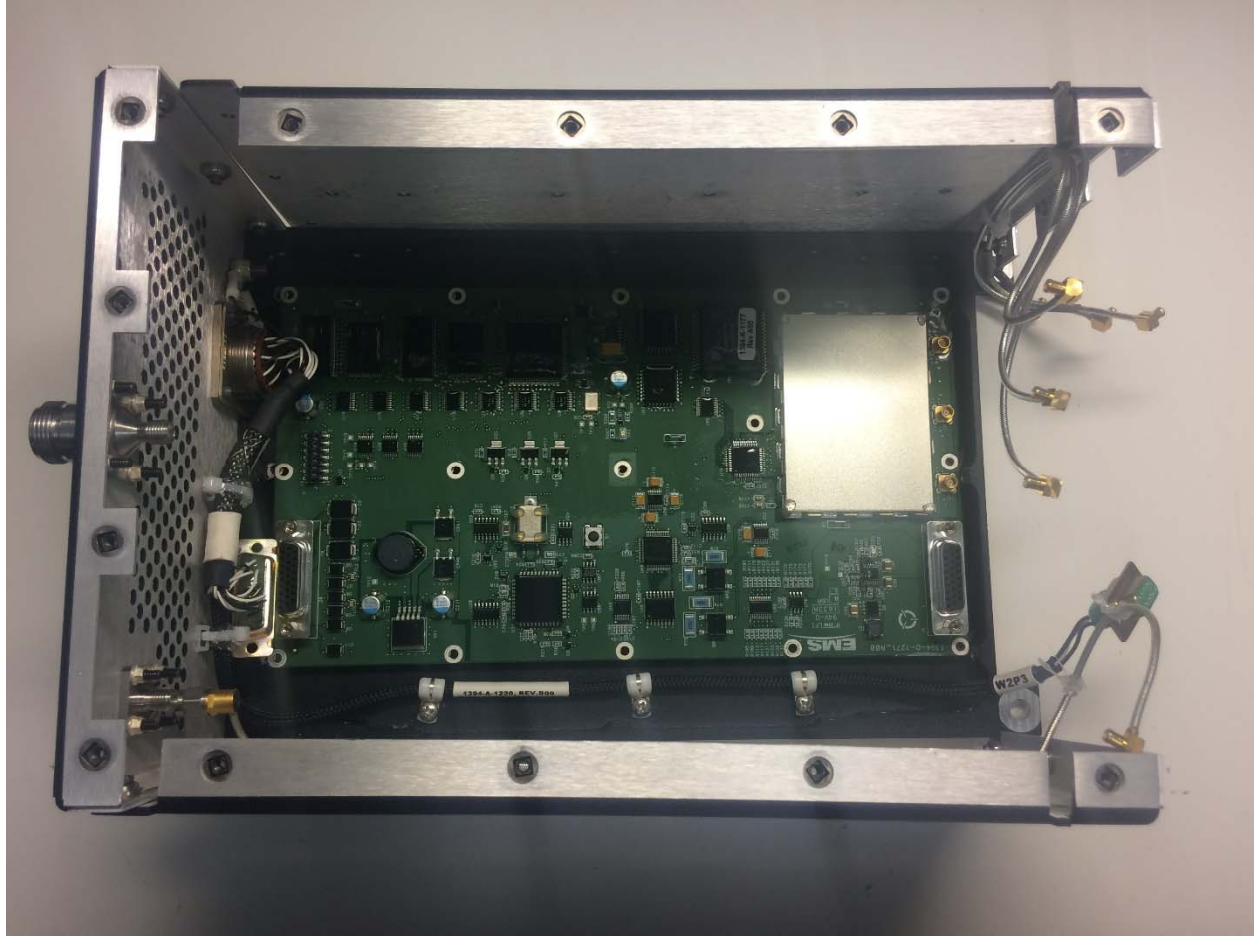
1394-A-1219\_B00 CCA FMPA Inside the Box View
